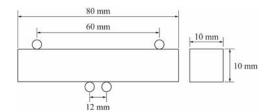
A sketch showing the specimen geometry and the loading configuration used for the four-point bending fatigue.
